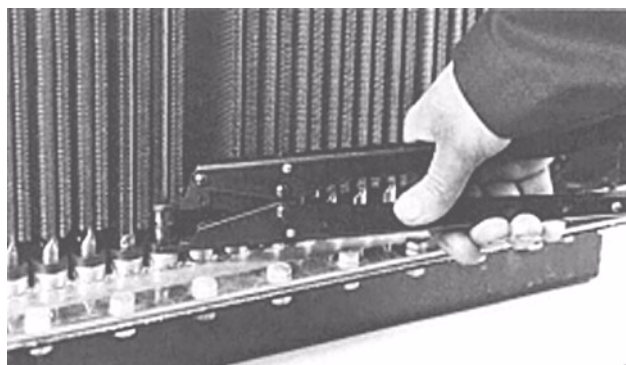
INSTALLATION TOOL (VJ6567)
